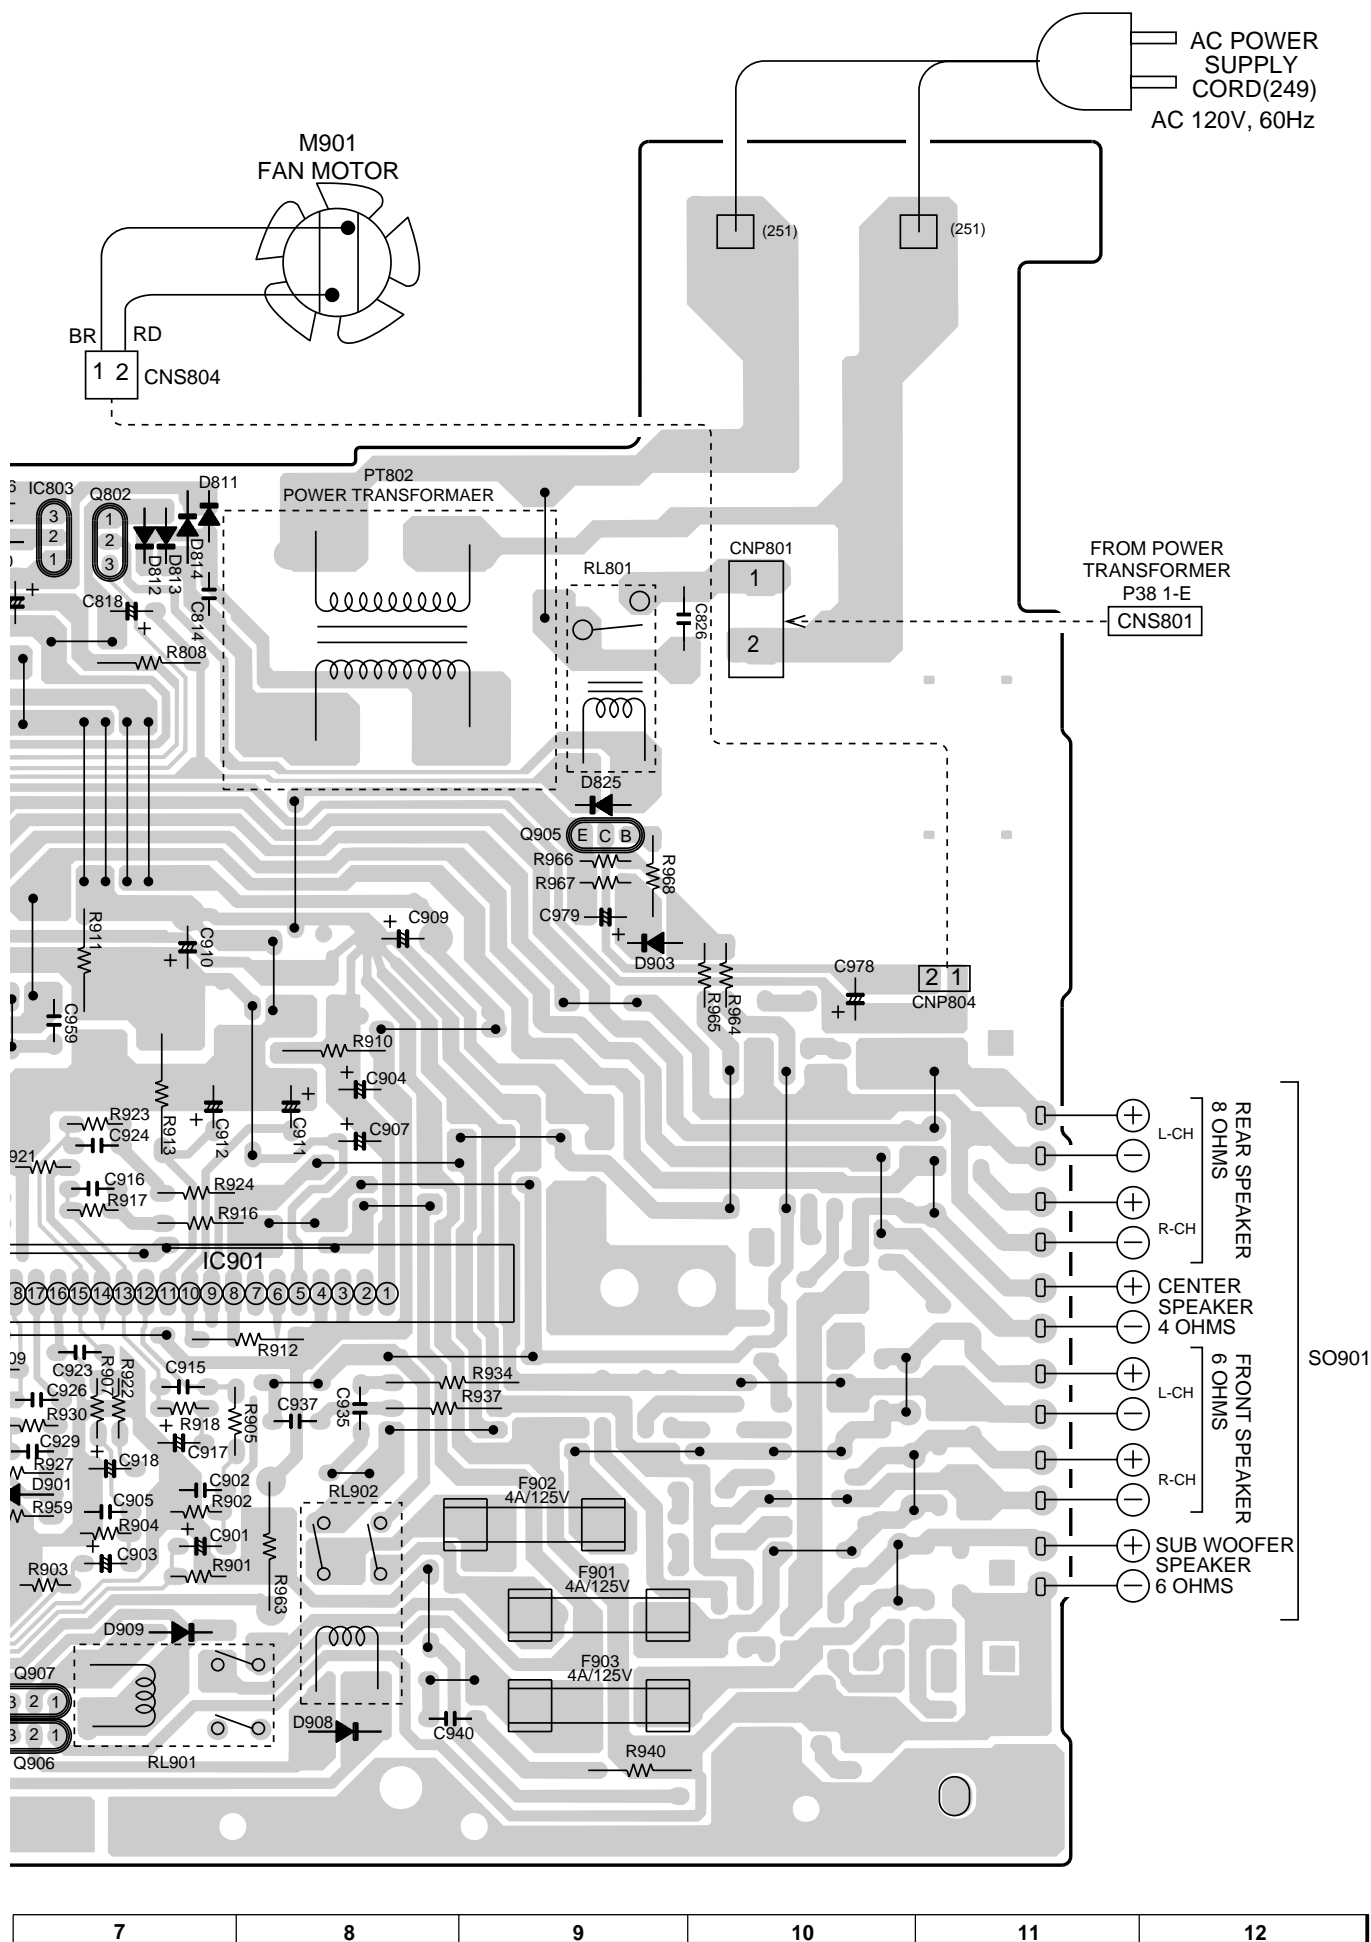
WIRING SIDE OF P.W.BOARD (6/8)
